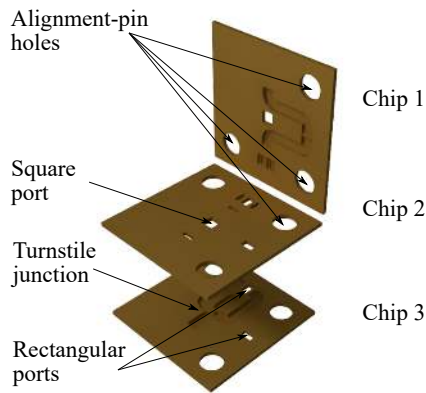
Exploded view of the three-chip stack forming the OMT component.
